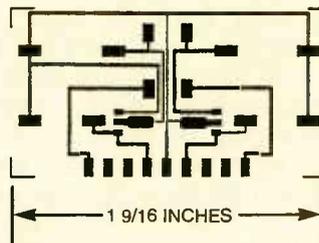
Shown here is a full-size template for the ± 18 -volt power supply's (SIP-18V's) printed-circuit layout. Note that the board for the power-supply module is slightly (about $\frac{1}{2}$ inch) larger than the other boards.
